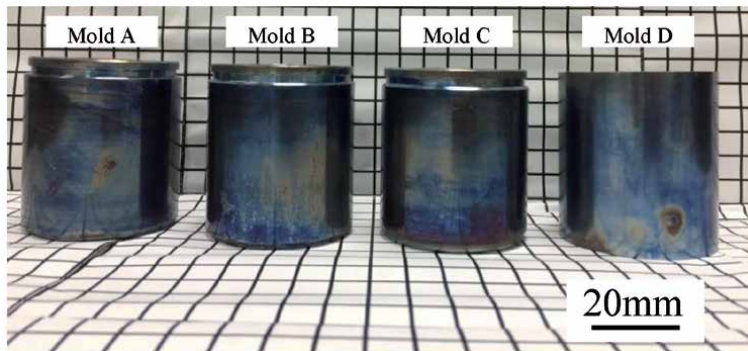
Used molding die surface at slumping method process. [NHK120-H, 120 min at 670°C in electric furnace].
